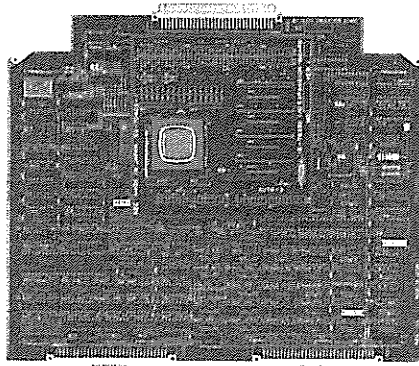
Checking the Contents of the Package(1) Checking the boards
